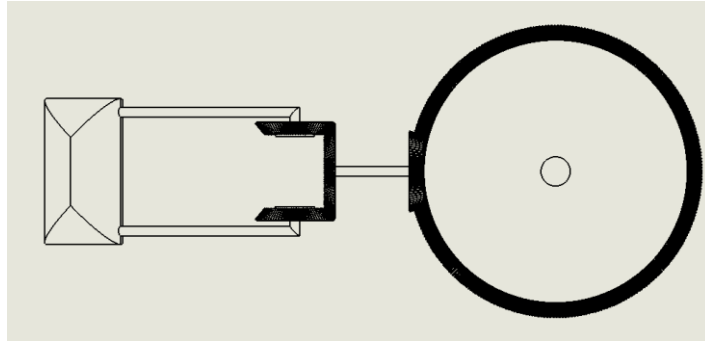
View of an ensemble composed of a SPIDER UP's arm and the central wheel
